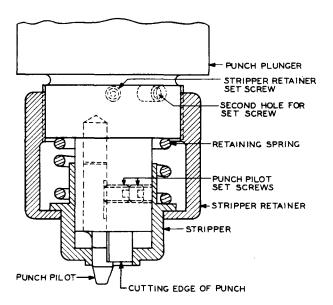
Hole-Enlarging Punch (side view) (660A tool shown)
